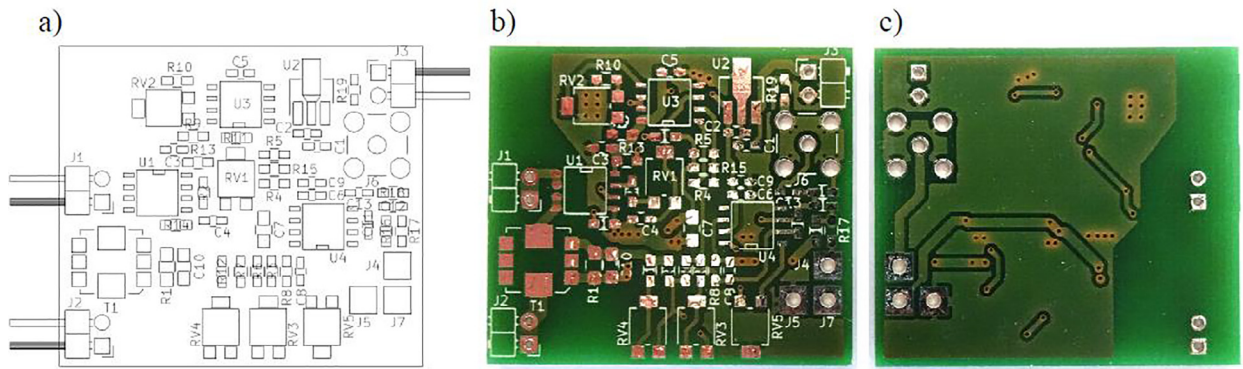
a) PCB silkscreen b) top and c) bottom view of unpopulated PCB.
